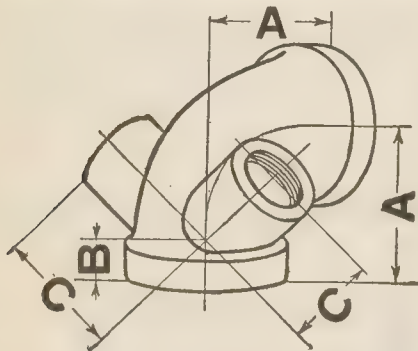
,052.—Dimensions of Essex 90° elbow with angle inlets on both sides, size of inlets, 2"
